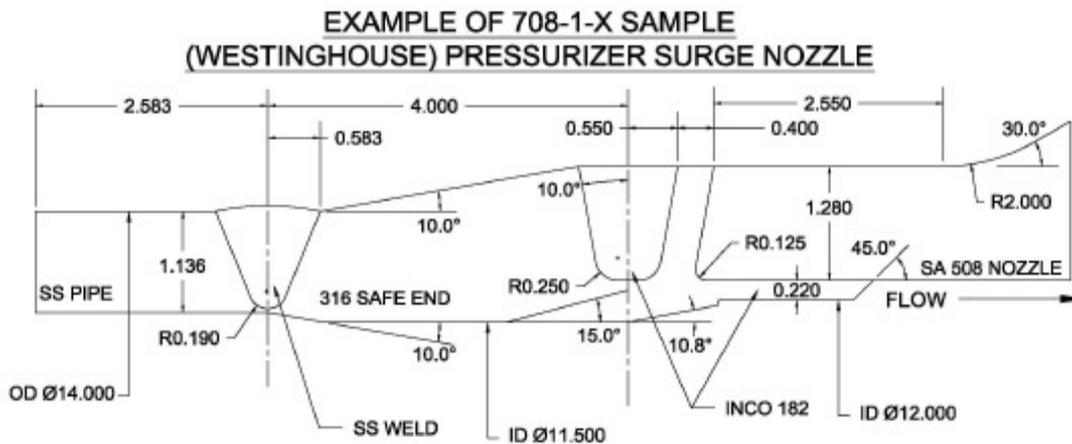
New PDI Dissimilar Metal Weld Configuration 708-1-X
